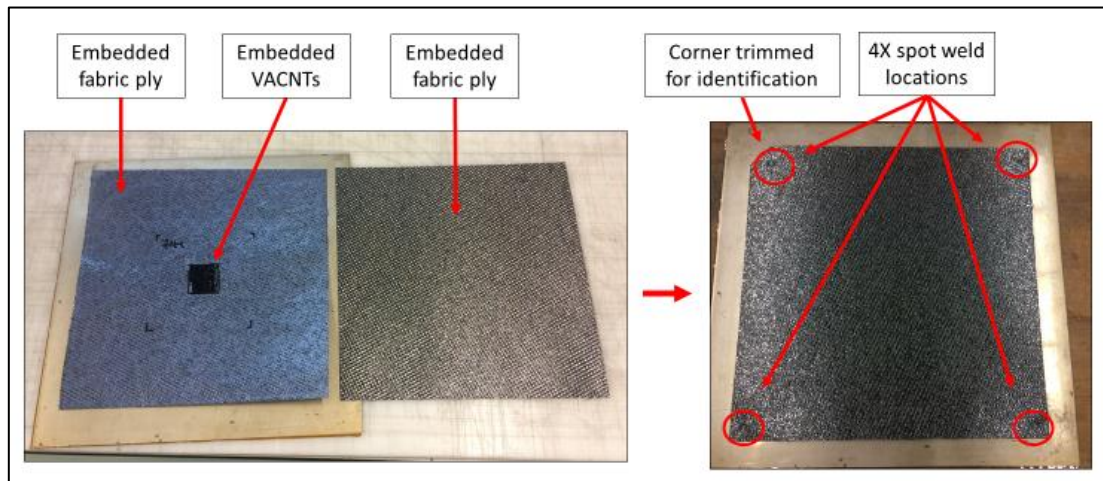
Embedded fabric specimen for consolidation and spot-welding locations
